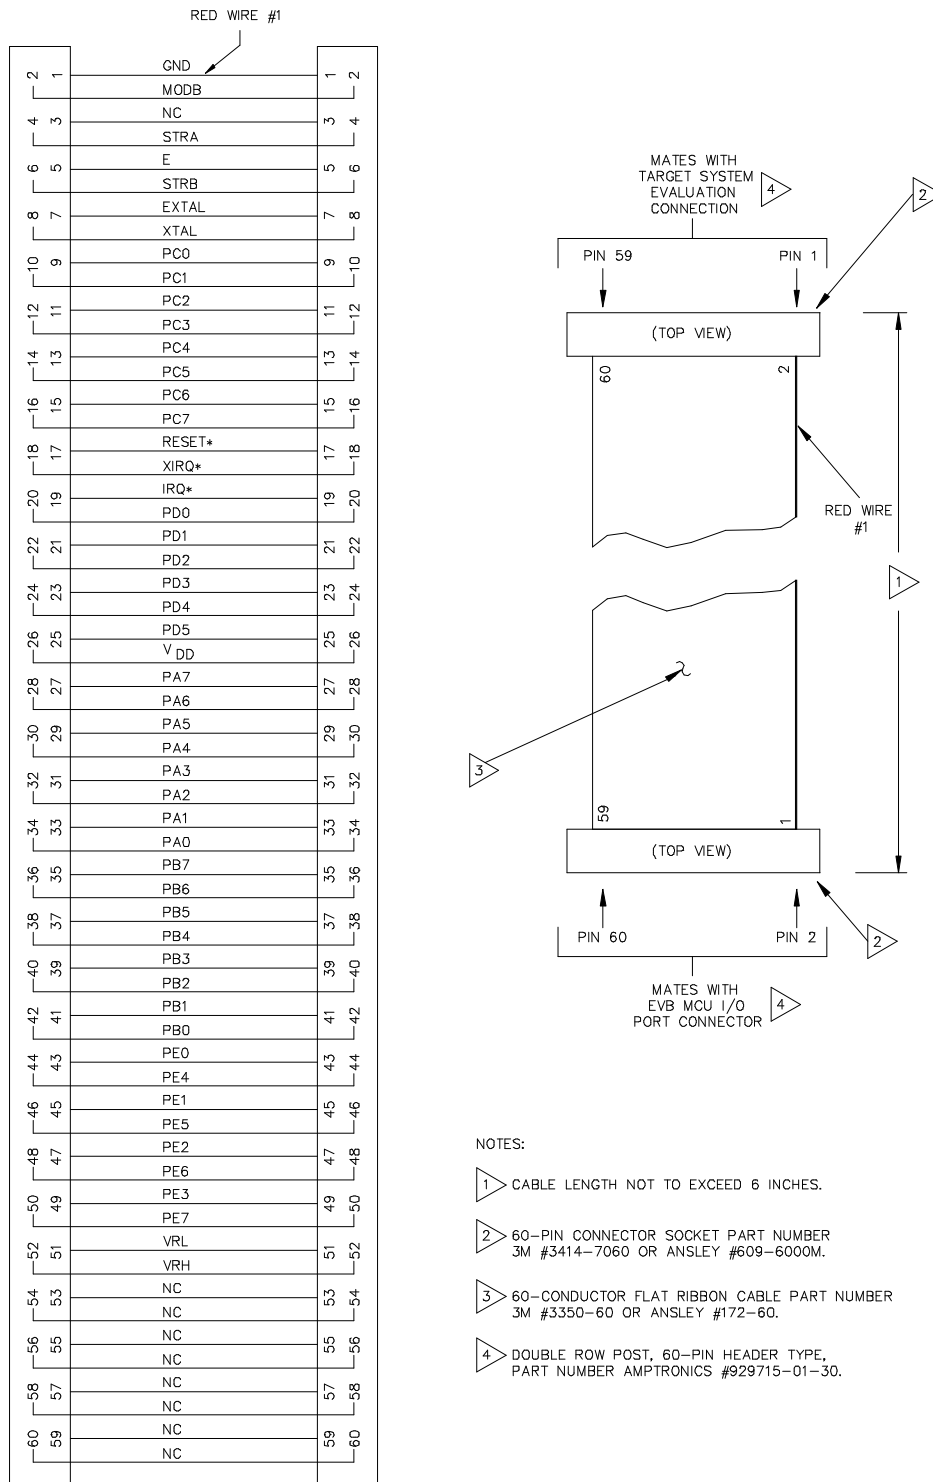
MCU I/O Port Extension Cable Assembly Diagram
